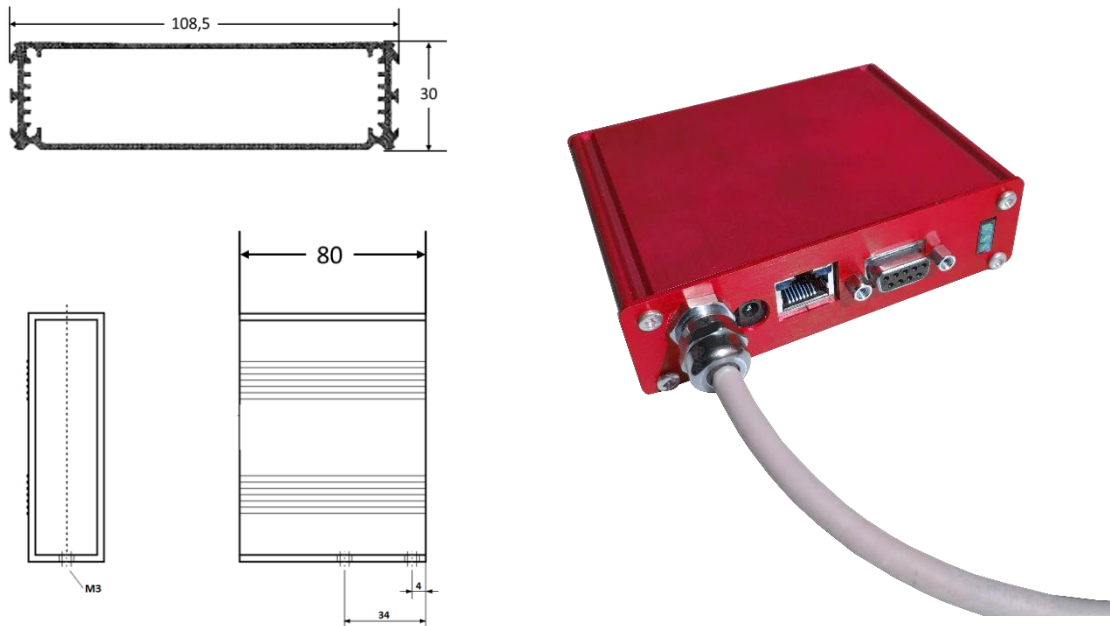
Dimensions and picture of the OilQsens® communication module.
